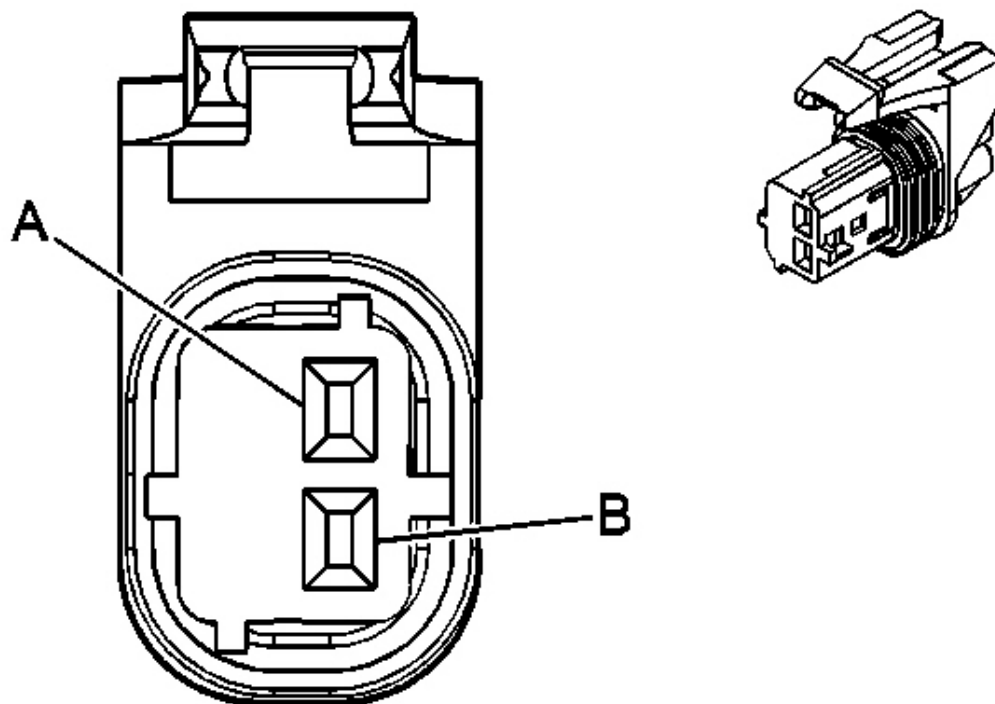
Inflatable Restraint Front End Sensor - Left Connector End Views
